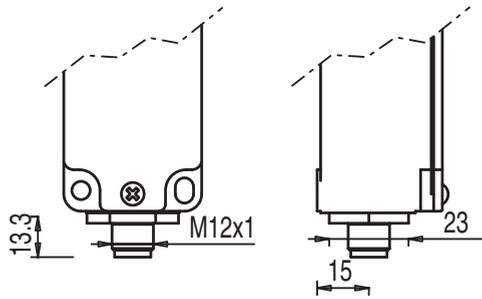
Dimensions of S200-M4C1-M12 in mm (here, M12 connector dimensions)
